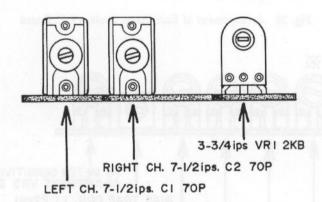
OSC. P.C. BOARD (GX-400D PRO)
